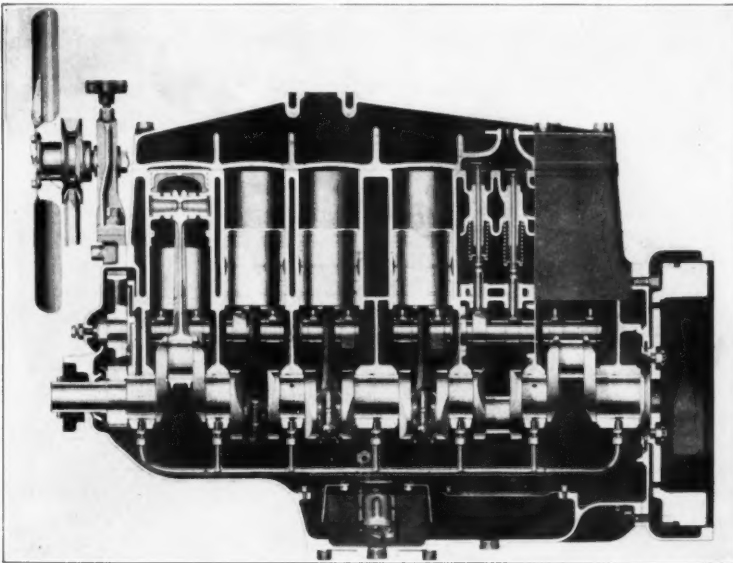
Full pressure lubrication system. Note oil seal preventing leakage at flywheel.
